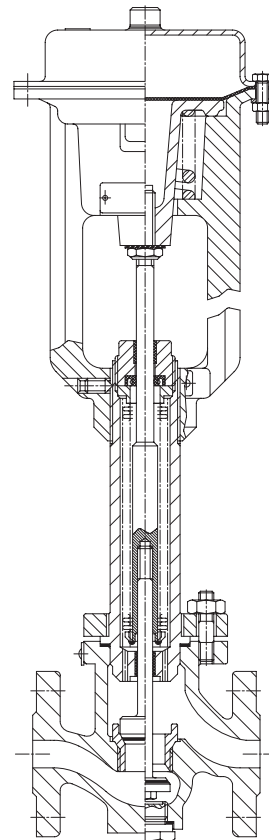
· Type 3351-1 Pneumatic On-off Valve version with bellows seal
